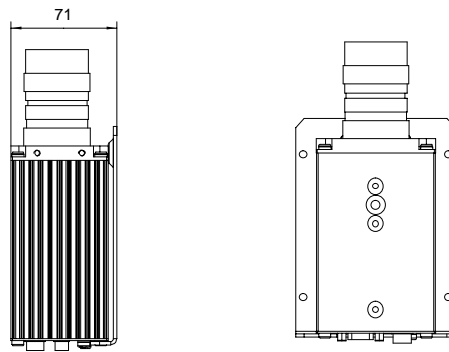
Dimensions with a Mounting Bracket Attached (Top Mounting)
